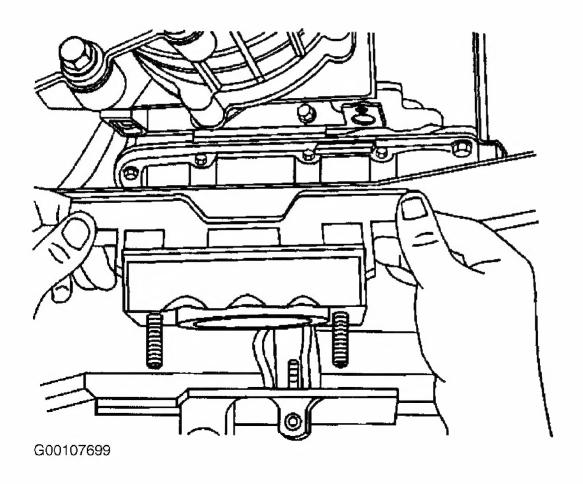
Removing Automatic Transmission Mount Courtesy of GENERAL MOTORS CORP.
